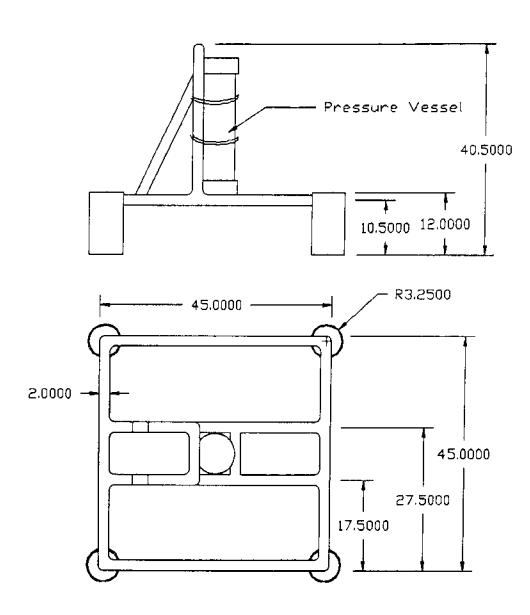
Bottom Mooring Design with Pressure Vessel Attached (Dimensions in Inches)
